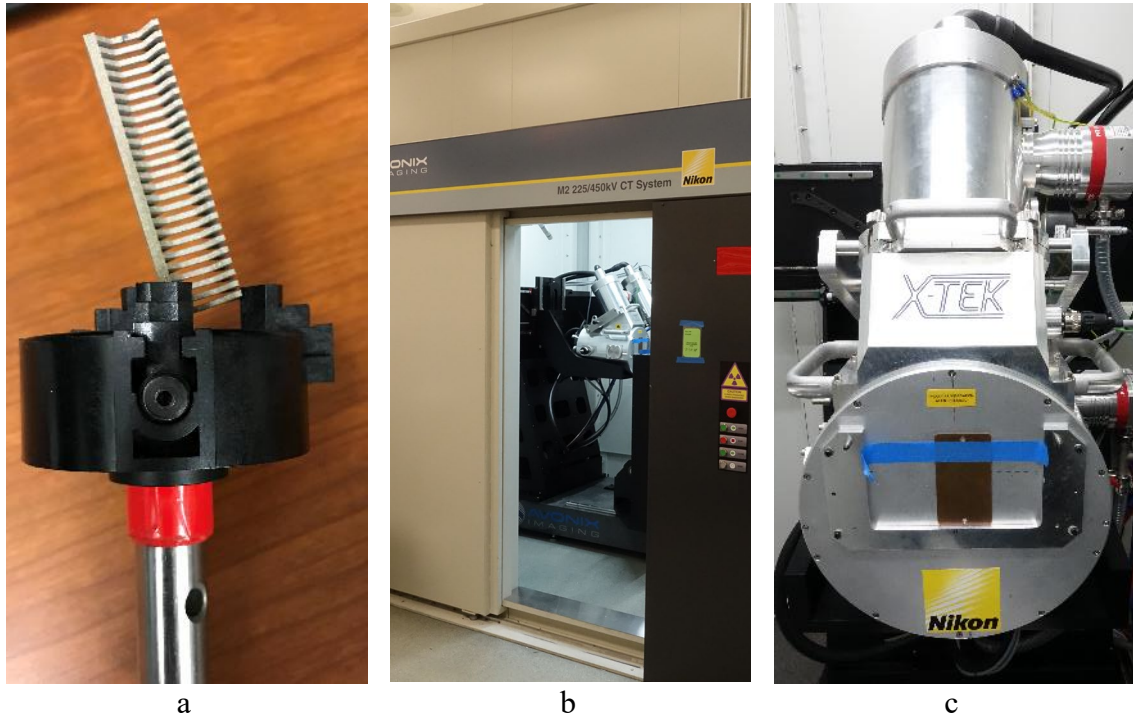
Computed Tomography Inspection Setup. a) Sample array fixturing. Silver cylinder is held vertically in CT system for fixturing. b) Nikon CT system. c) 450 kV x-ray source with Cu prefilter attached.
